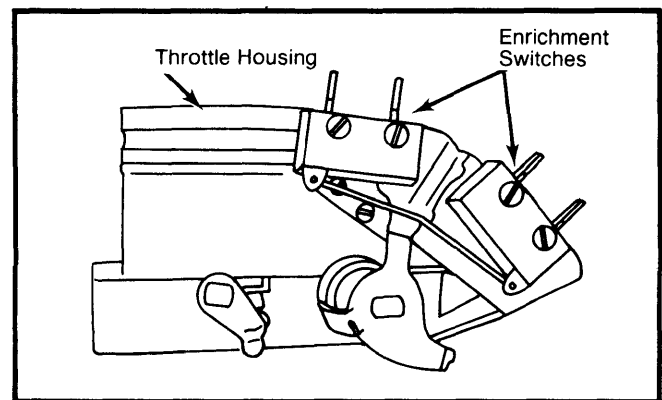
Throttle Enrichment Switches (Porsche 924 Turbo Shown)
